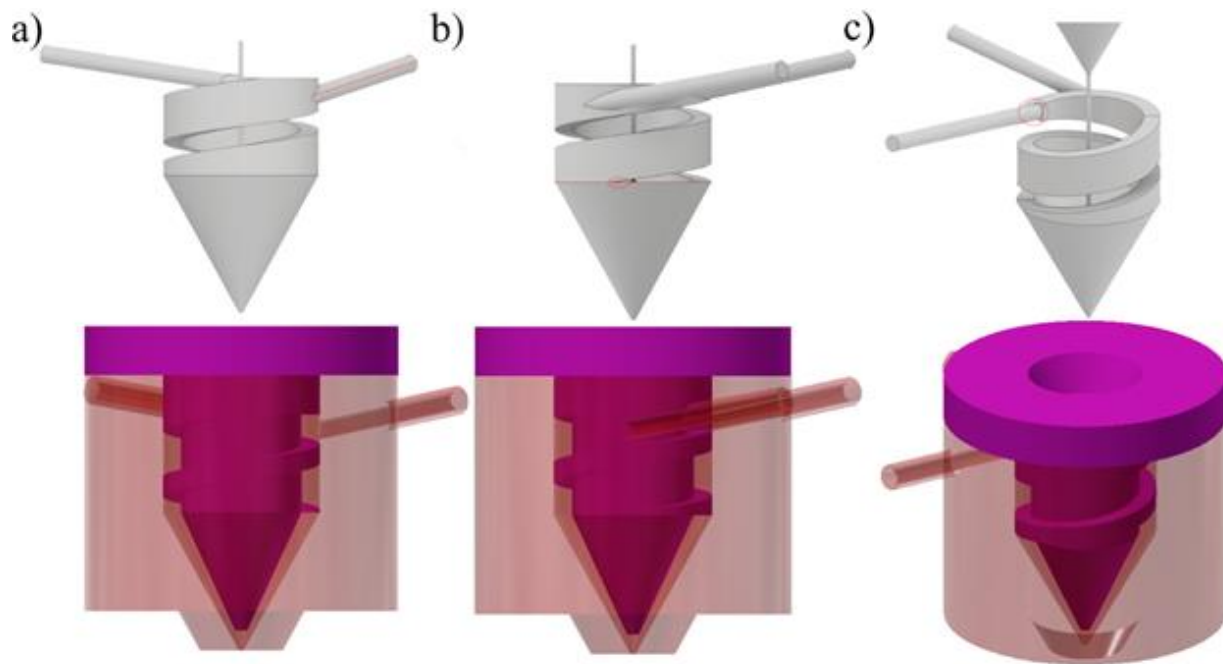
Detail Design Consideration of Head 2 and Core a) Inlets Parallel to Helical Rib b) Terminus of Helical Rib is the Horizontal Plane of the Shaft c) Removing Dead Volume at the Inlet
